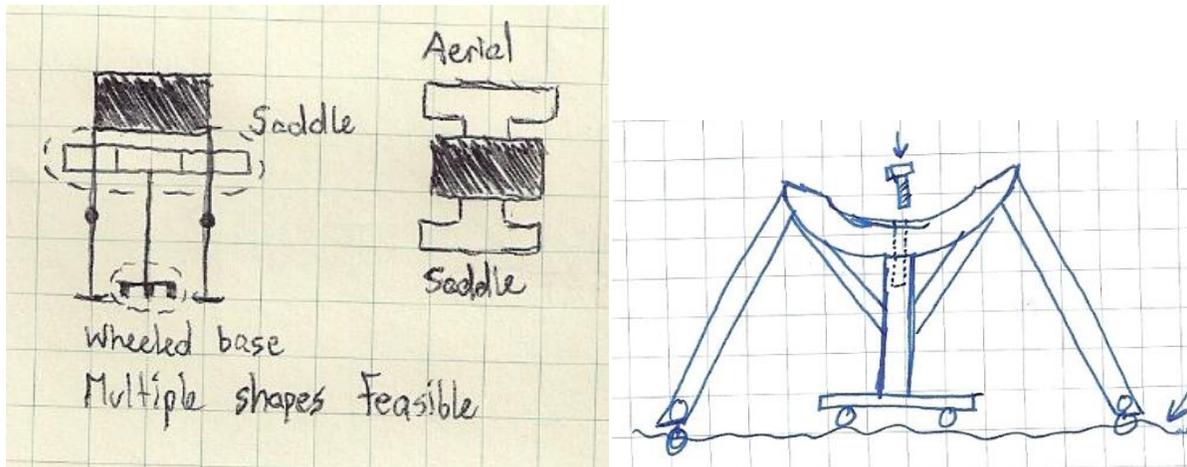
Example of the unicycle design. Both concepts would require an operator to push them and follow the robot's motion.
